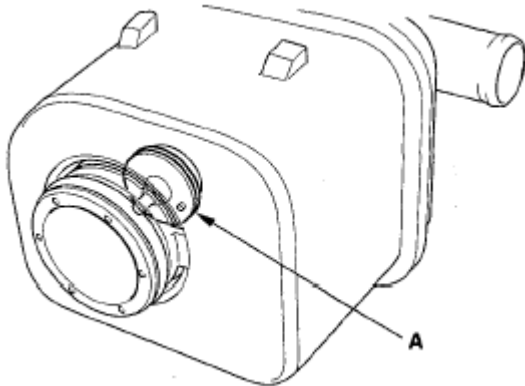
Identifying EVAP Canister Vent Shut Valve
